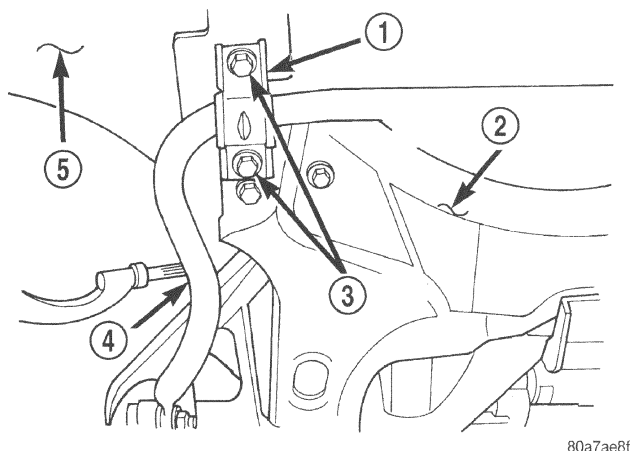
Front Suspension Crossmember Side To Side Locating Mark
